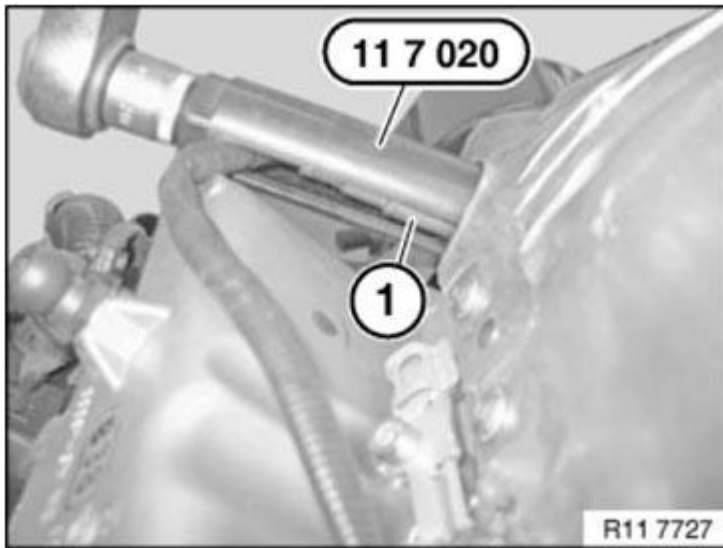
Installing Monitoring Sensor Using Special Tool 11 7 020
